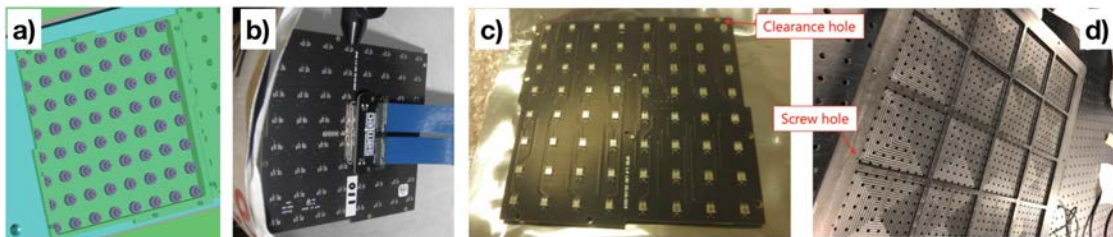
a) CAD drawing of a group of 64 WLS fibers held in a G10 frame pocket using optical connectors. b) picture of the backplane of an MPPC PCB. c) picture of the front-plane of an MPPC PCB. d) Picture of a G10 prototype frame showing the pockets and drilled holes. The screw mounting points are highlighted using red arrows and labels.
